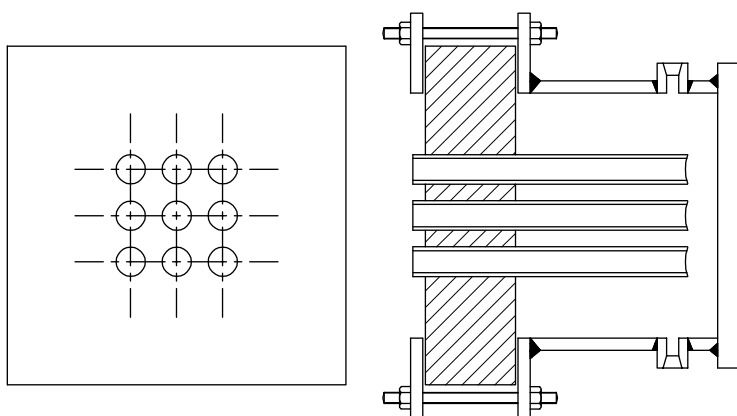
Welded tube-to-tubesheet model pressure test setup.
